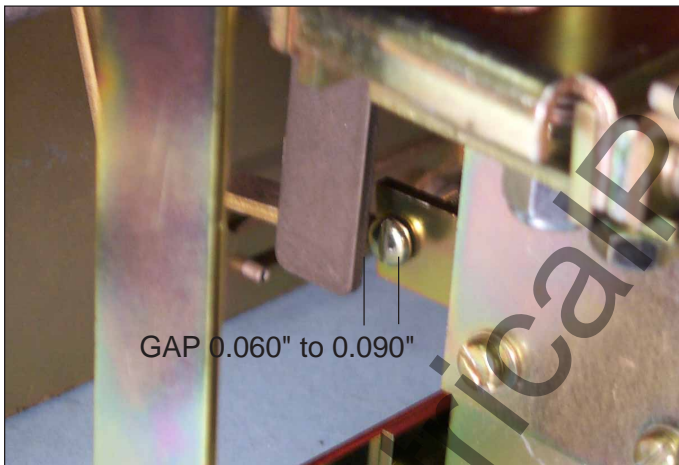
Adjusting the Gap Between the DTA Adjusting Screw and the Breaker Trip Paddle.
